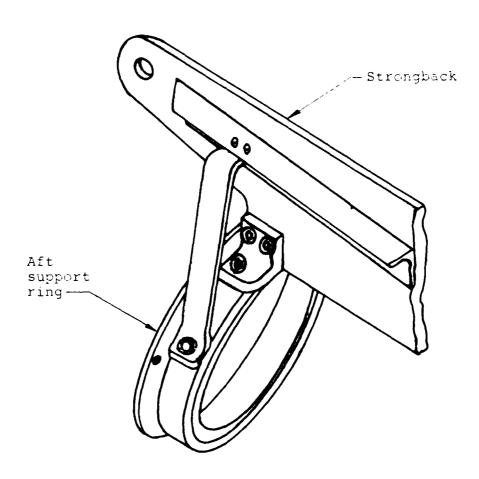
AFT RING - STRONGBACK ASSEMBLY
